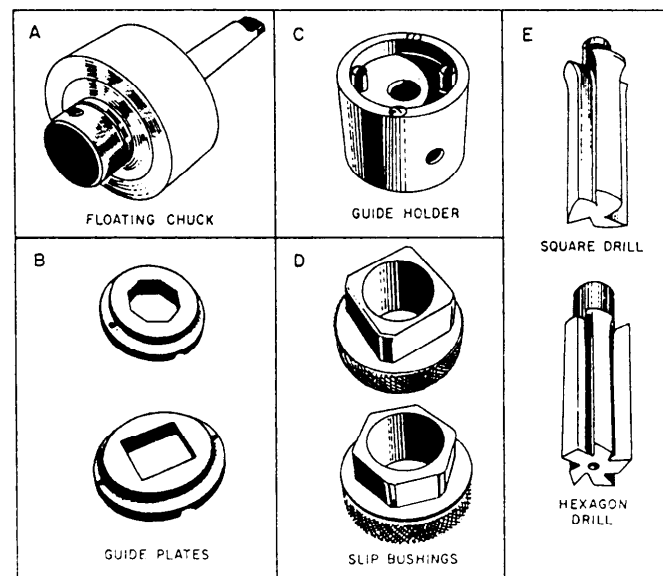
Equipment for drilling angular holes. A. Chuck; B. Guide plate; C. Guide holder; D. Slip bushing; E. Angular drill.
